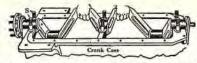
A. Spotting-in the upper halves of the crankshaft main bearings by giving the crankshaft bearing surface a thin coat of blue and rocking it back and forth.
